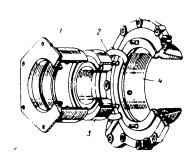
Compressor Rotor Front Three-Row Ball Bearing Assembly
